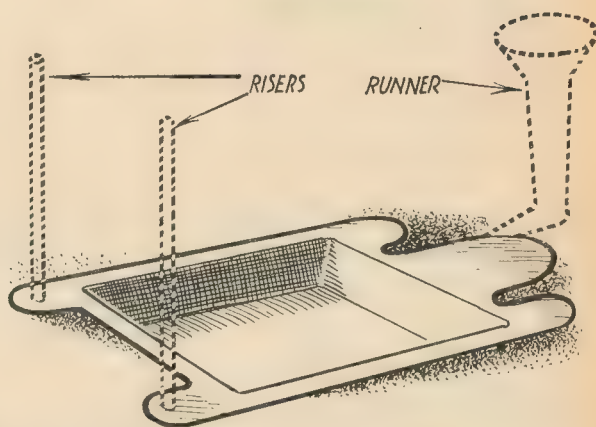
Moulding the baseplate, showing positions of runner and risers
